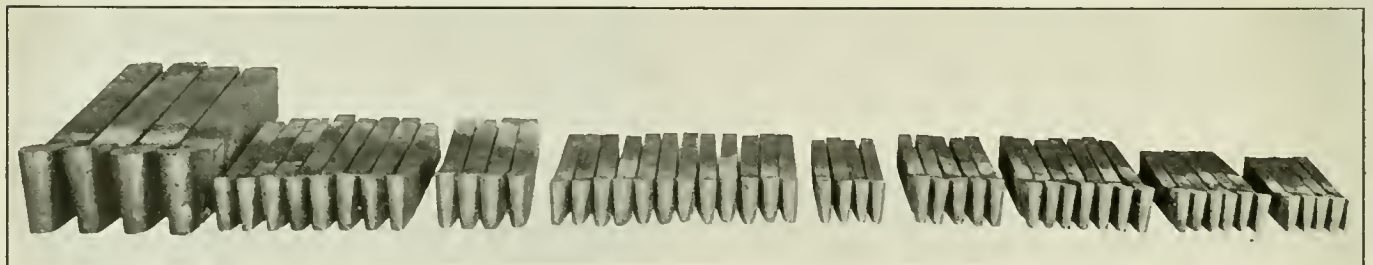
Group of Lathe Tools with High Speed Steel Welded Tips
